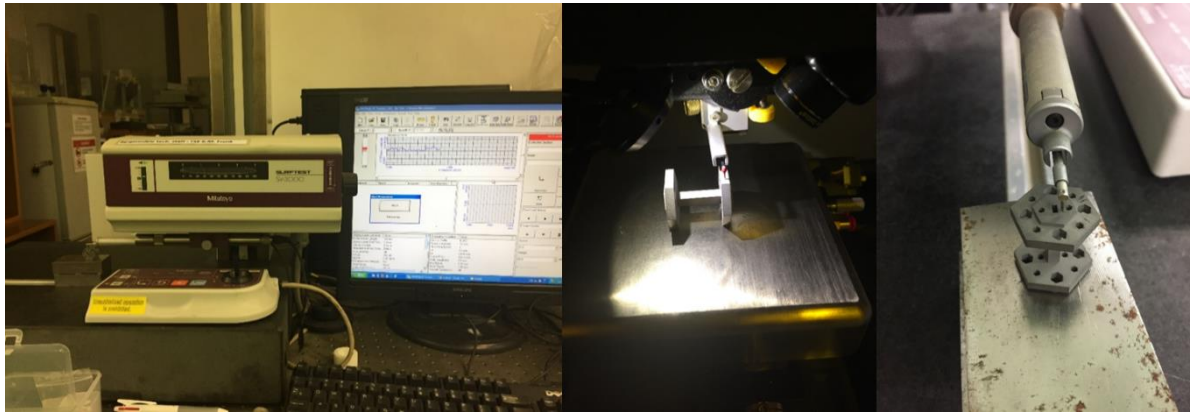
Photograph of the surface roughness measurement setup, using a Mitutoyo SurfTest SV-3000 CNC surface roughness tester.
